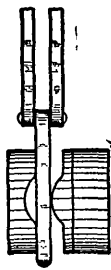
Contacts worn with a flat pit and a projection. A flat .020" gauge spaces contacts .040" to .050"
